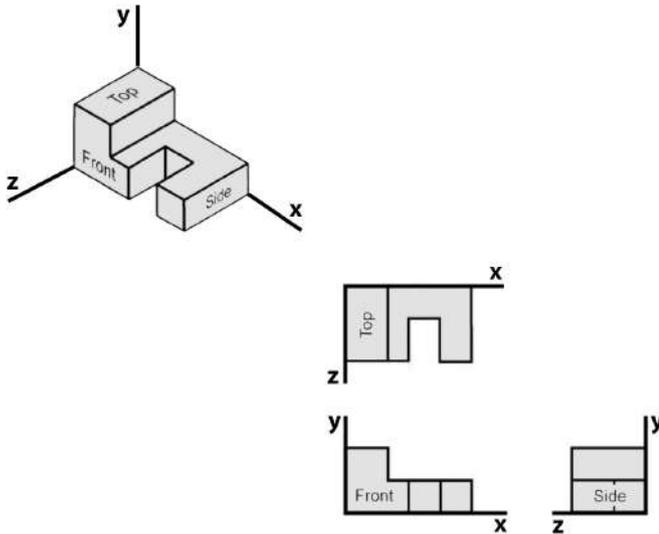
Three-dimensional object represented in a single view drawing (top left) and multi-view drawing (bottom right).
